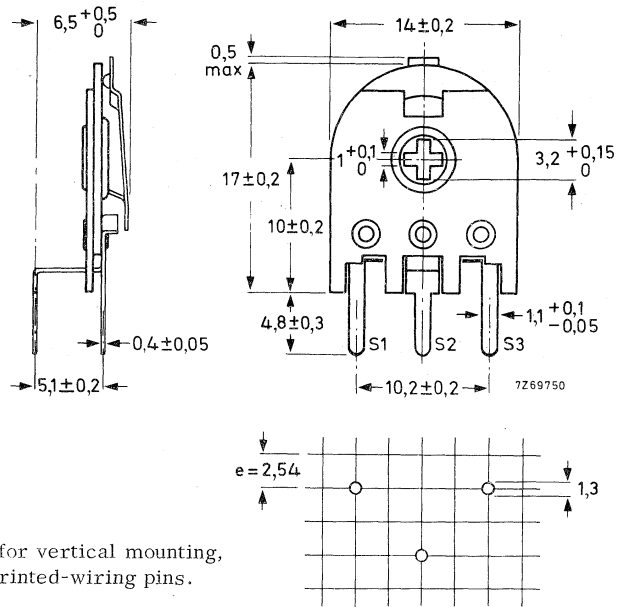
Potentiometer for vertical mounting, with straight printed-wiring pins.
